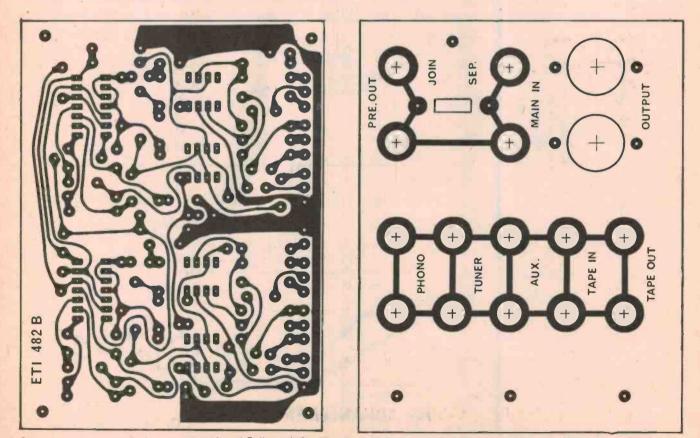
Printed circuit layout of the tone control board. Full size 110 x 80 mm. Fig 9. Details of the rear panel. Material 1.6mm fibreglass 1oz cu board.
